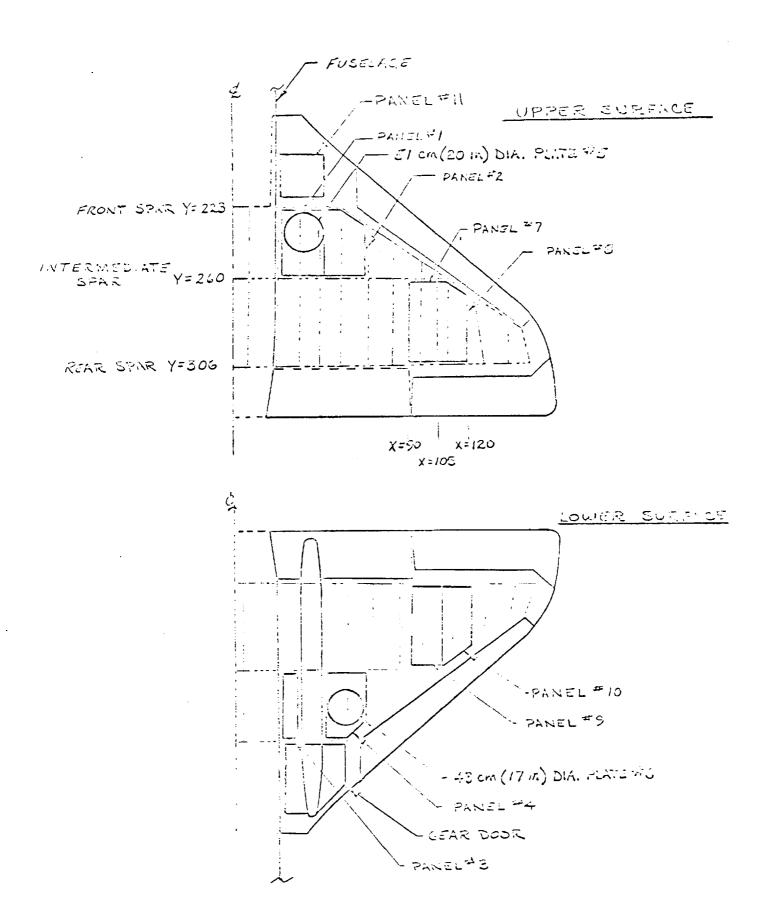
HOLE CONFIGURATION #12. PANELS 1,3,4,& 11 AND PLATES 5&6 REMOVED; GEAR DOOR LOCKED OPEN
